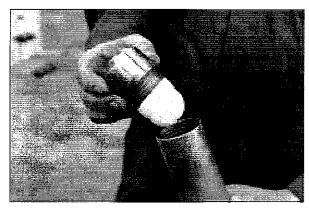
Thread an MC Cutting Shoe (shown with MC Core Catcher) into either end of a MC Sample Tube.
